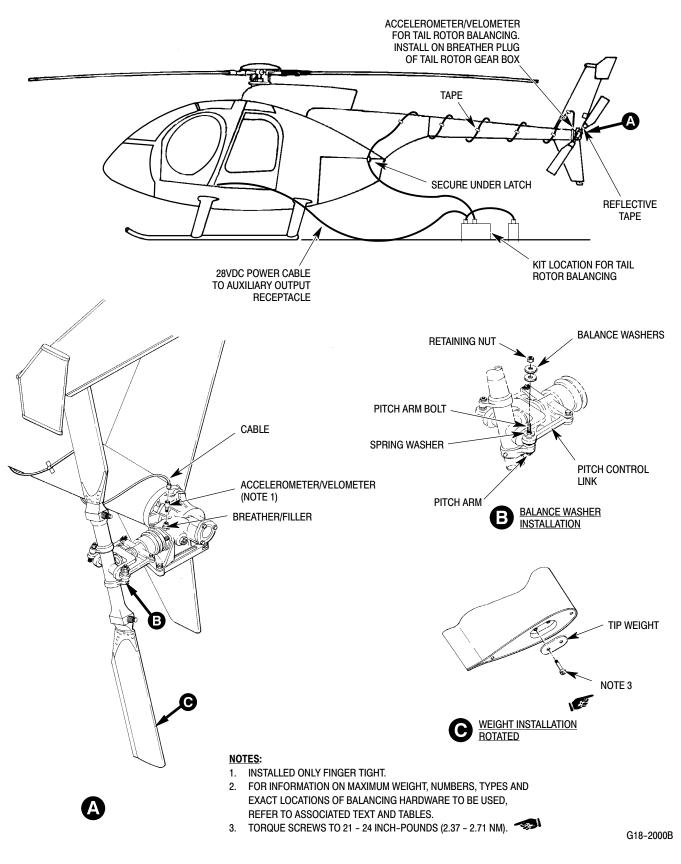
Tail Rotor Assembly Balancing (Two-Bladed Tail Rotor)
